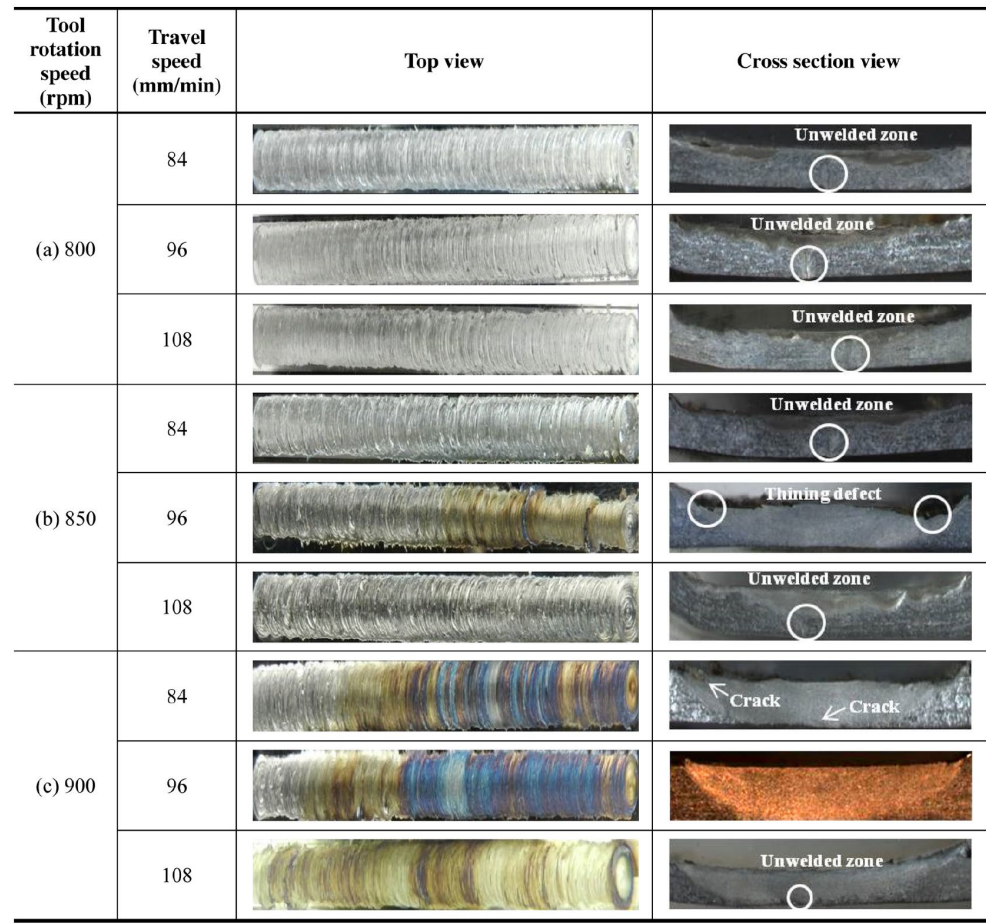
Butt FSW of 0.5 mm thick AISI 430M2. Top and cross-section view of joints welded with different v and ω : (a) 800 rpm, (b) 850 rpm, and (c) 900 rpm [115].
